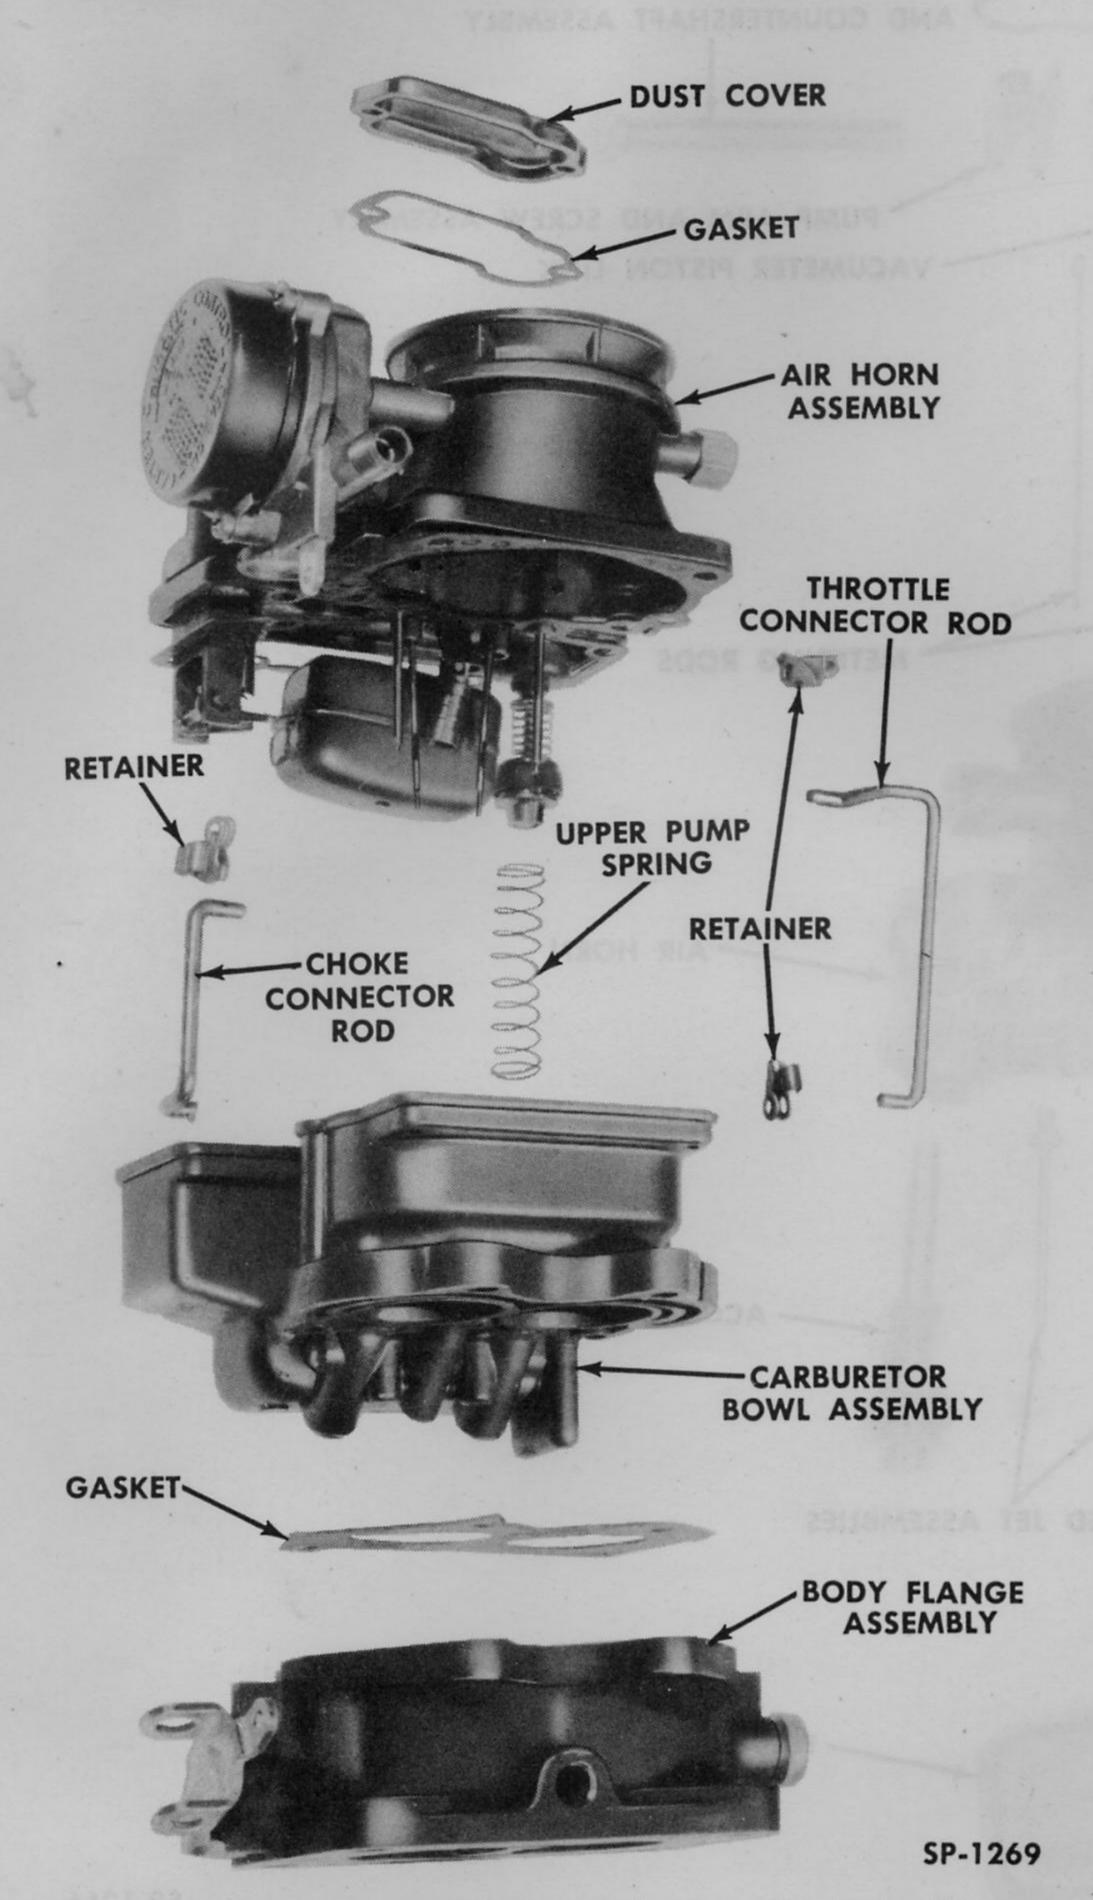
WGD-781S and 813S Carburetor-Exploded View
